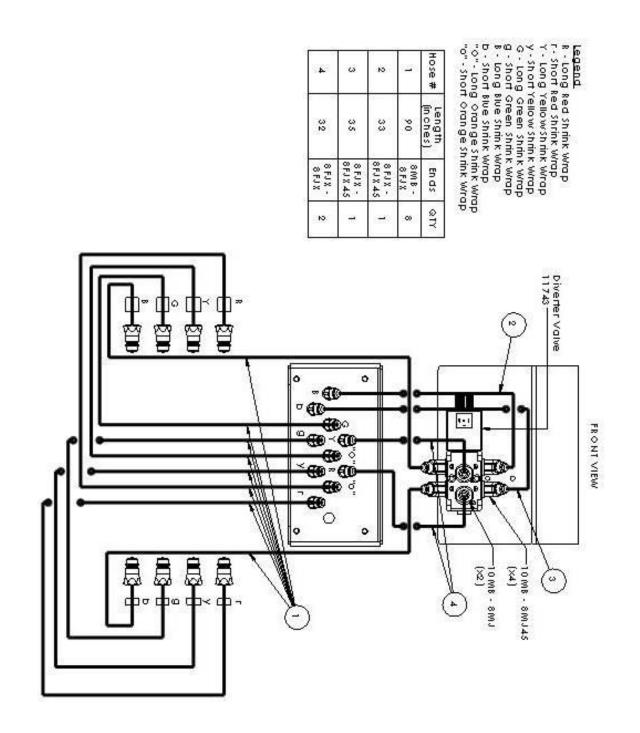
Pulldozer Transformer 1870 4 Remote kit
